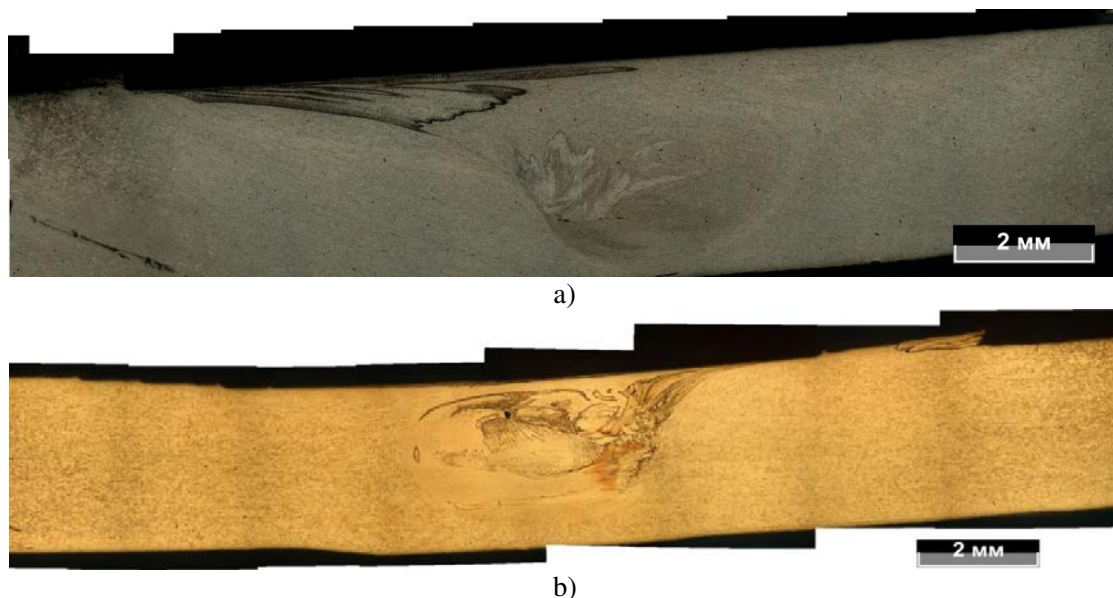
Macro- cross section of welded joints: a-aluminum AD1; b-copper M1 alloys.
